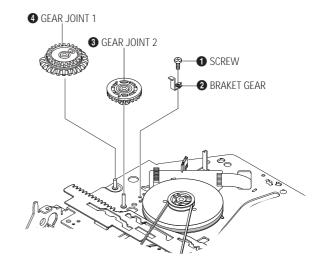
Bracket Gear, Gear Joint 1,2 Removal
